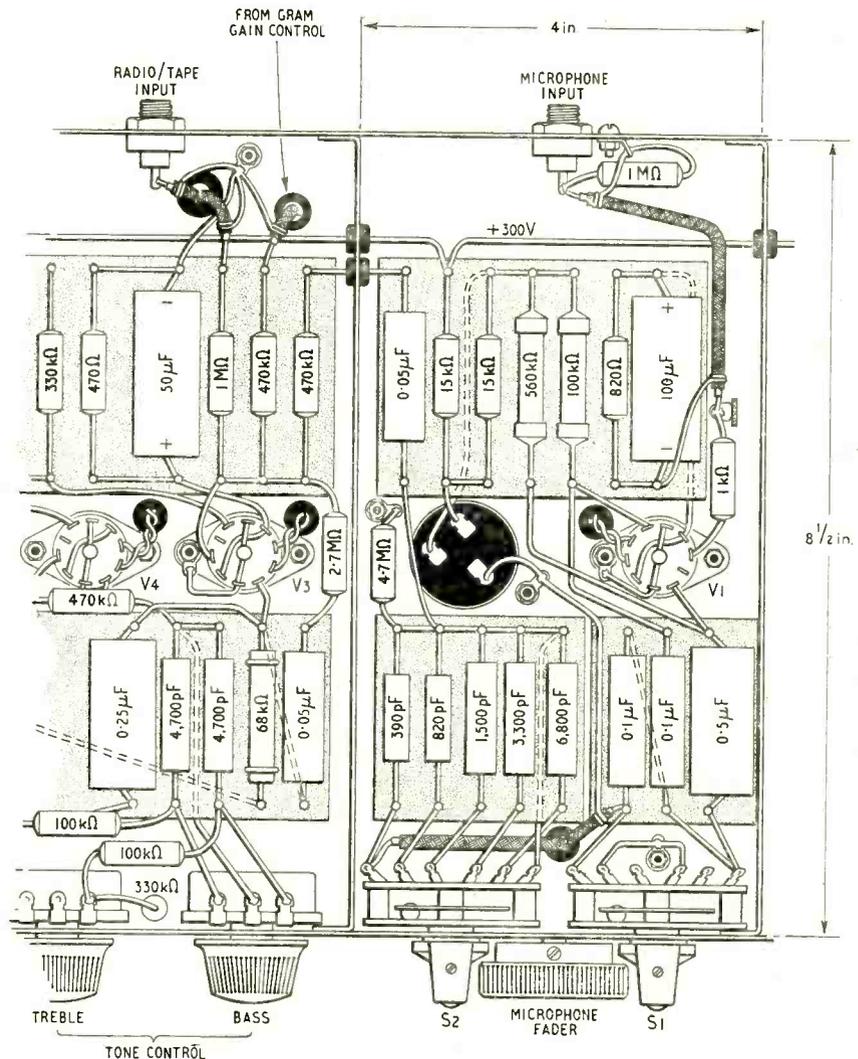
Underside view of part of the chassis, showing a suitable layout for the microphone and mixer stages.
